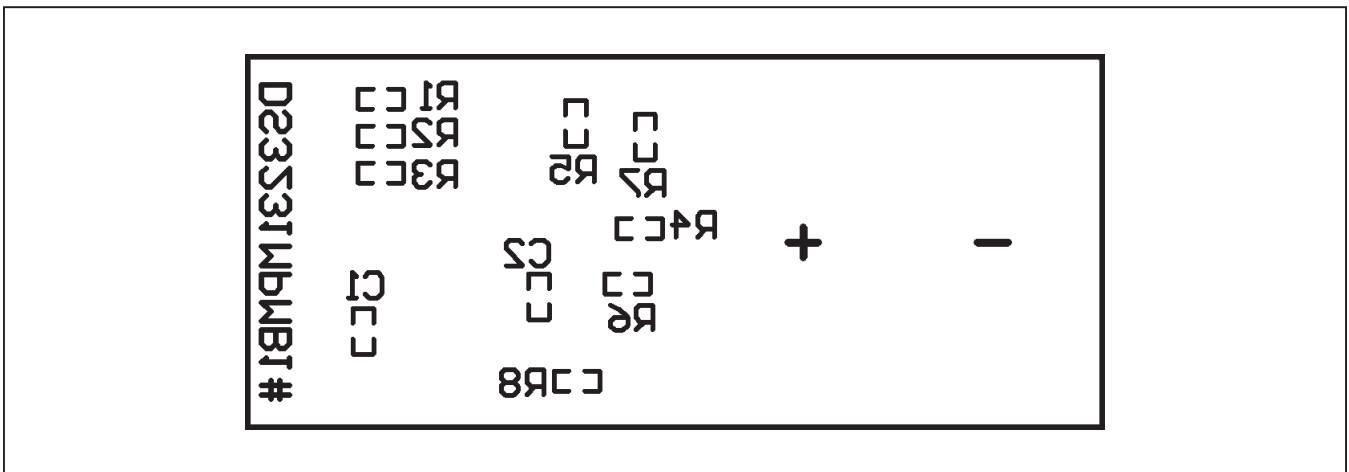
DS3231MPMB1 Peripheral Module Component Placement Guide—Solder Side
